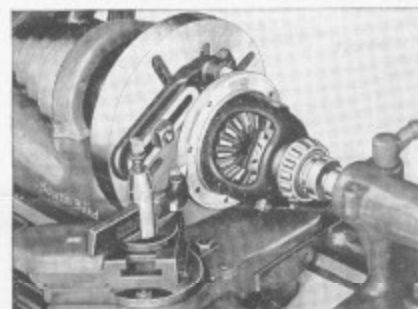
Truing Differential Gear Case Flange for New Ring Gear.
